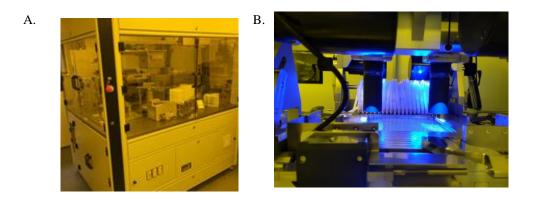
A. AutoSCIL 150 tool. B. Overlay alignment stage and optical inspection system.
